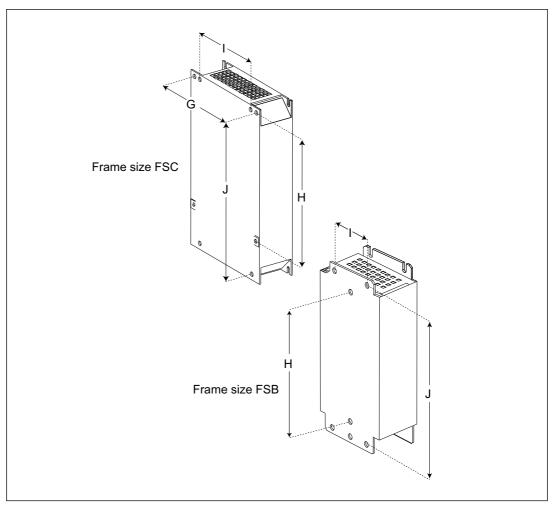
Mounting dimensions of motor reactors, frame sizes FSB and FSC
